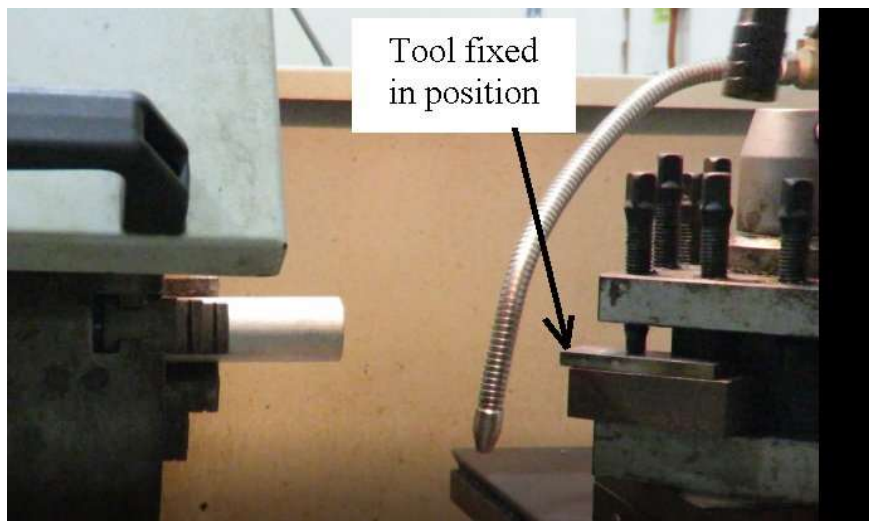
Tool fixed in the tool holder and ready for cutting
